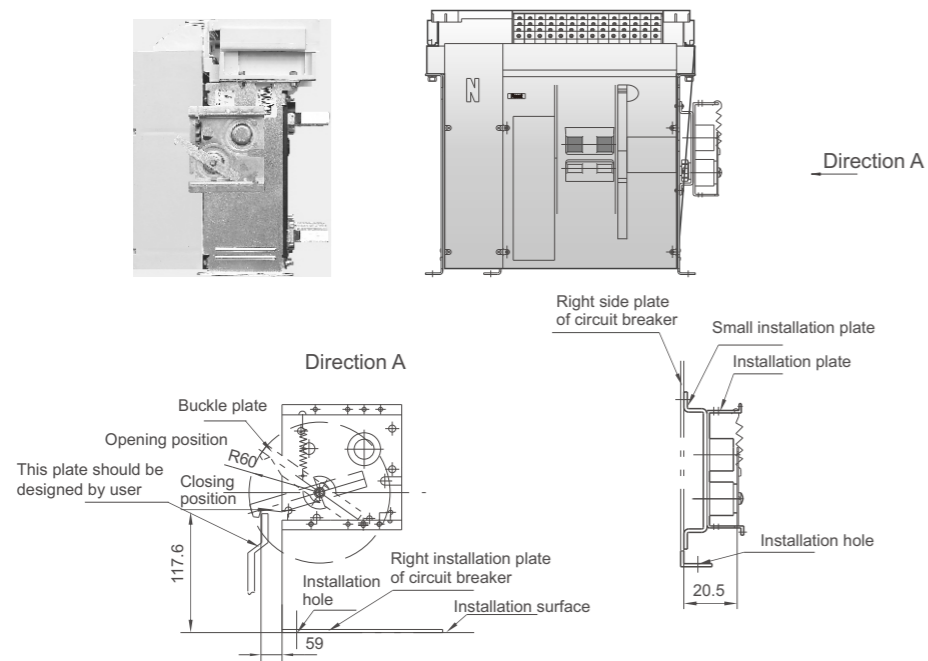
NA8-1600 fixed type circuit breaker status door interlock installation dimensions
